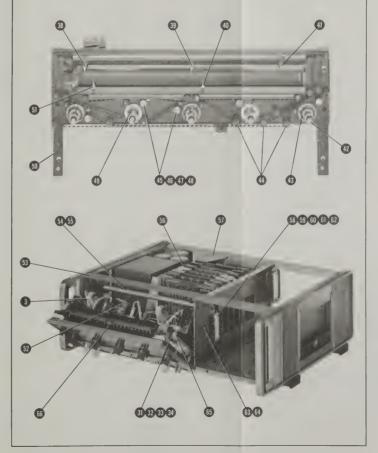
Front Panel Assembly, Parts Locations (3 of 4)
